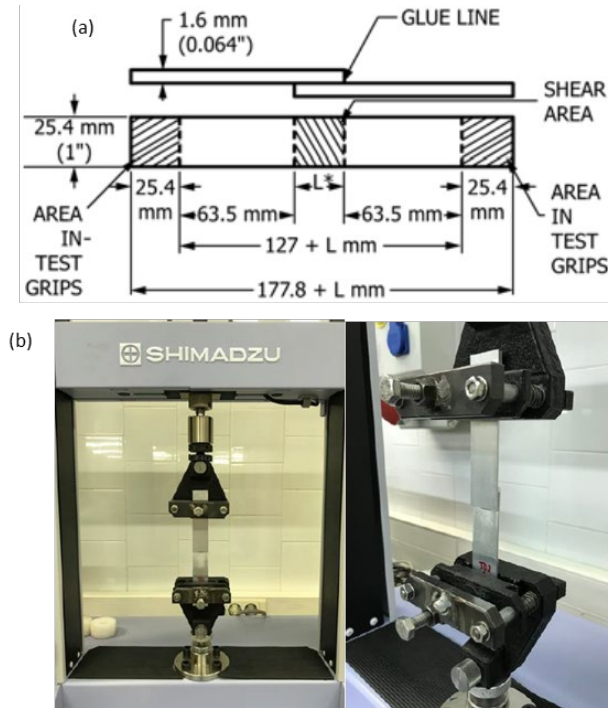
(a) Form and dimension of the SLJ has described in ASTM D1002-10; (b) Representation of how the sample is mounted in a universal testing machine.
